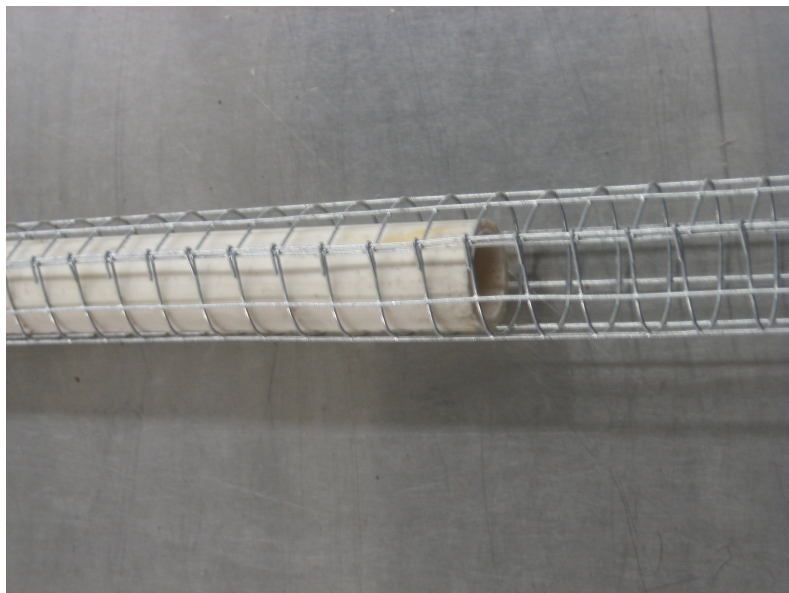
Thermosiphon Manufacturing: Step 4. The wire mesh cylinder once it has been formed.
